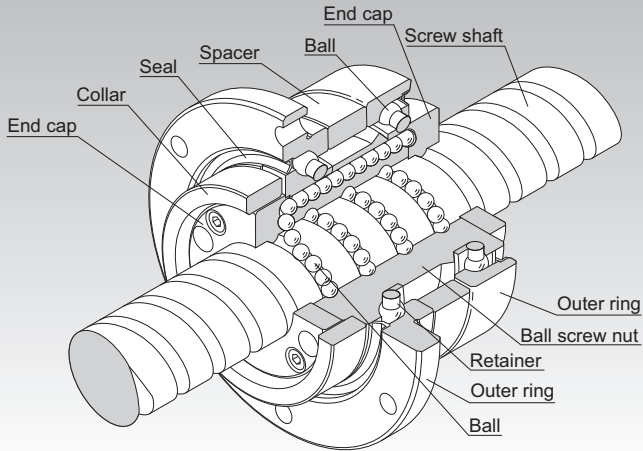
Structure of Large Lead Rotary Nut Ball Screw Model BLR
